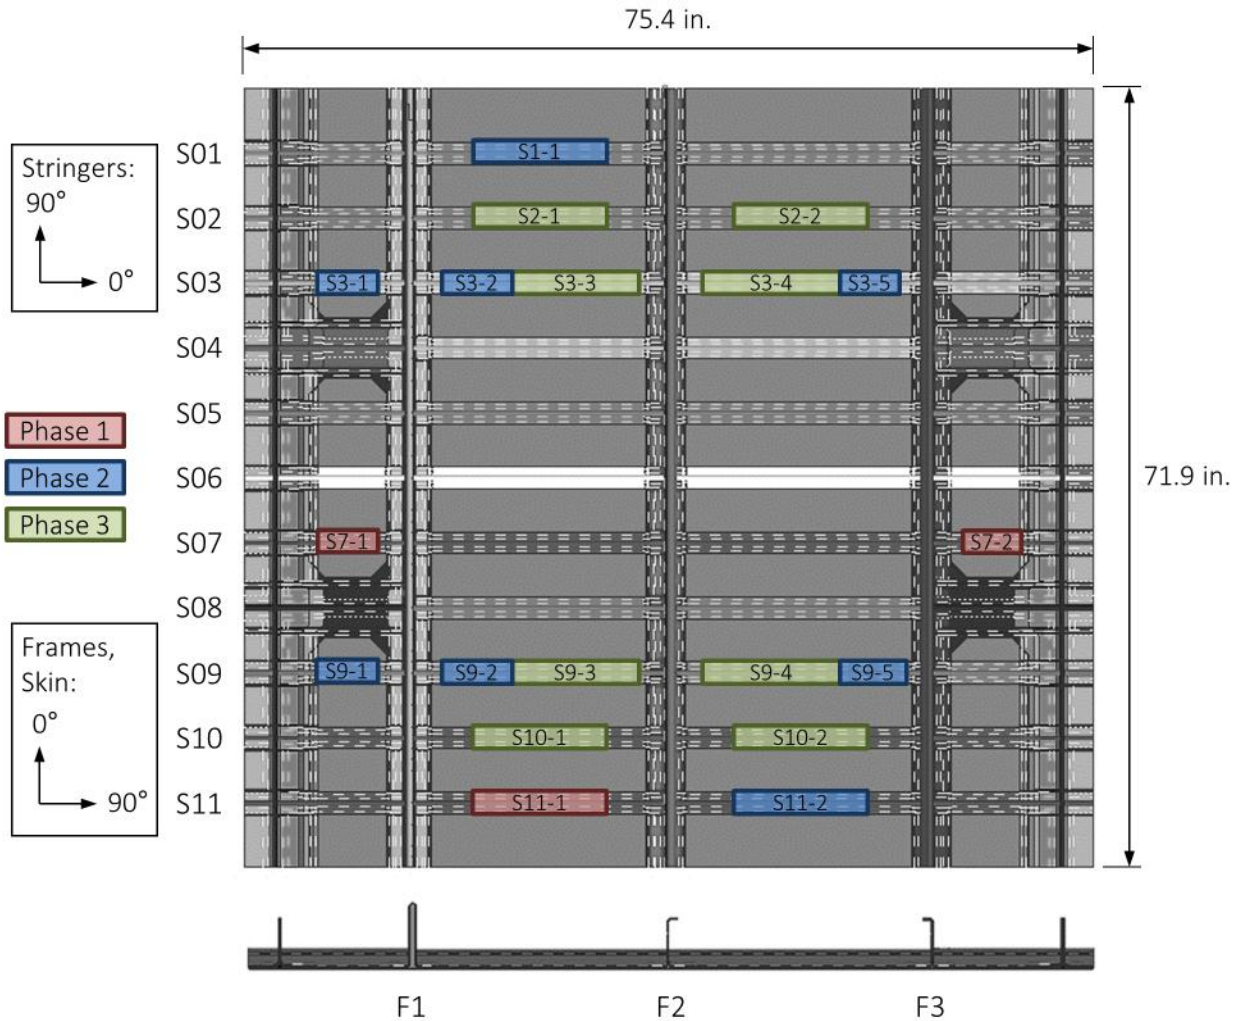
Alternate MBB center keel panel stringers which were harvested for stringer rod push-out test specimens.
